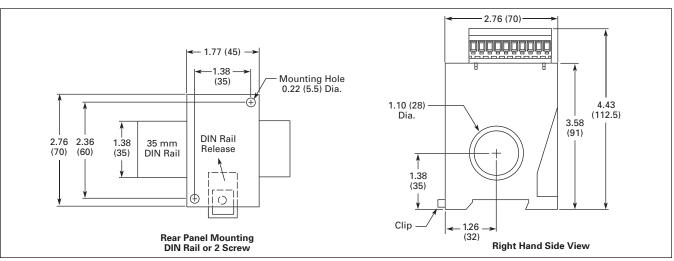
D64RP18 — Approximate Dimensions in Inches (mm)
